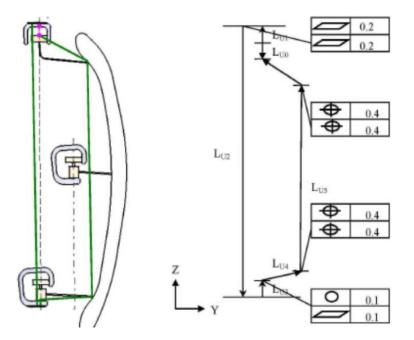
Fitting state(left) and dimensional chain with GD&T(right) in Z axis
